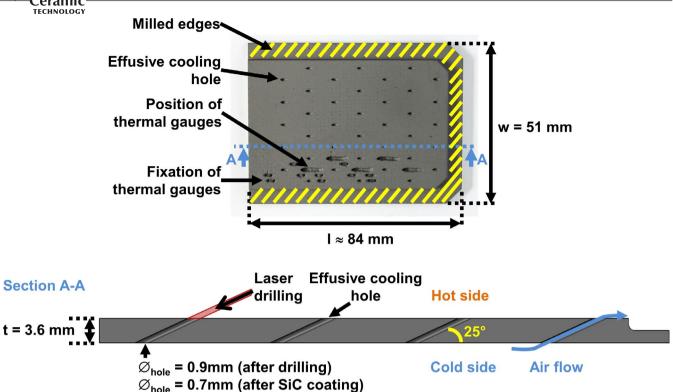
SiC/SiCN specimen dimensions and machining description
